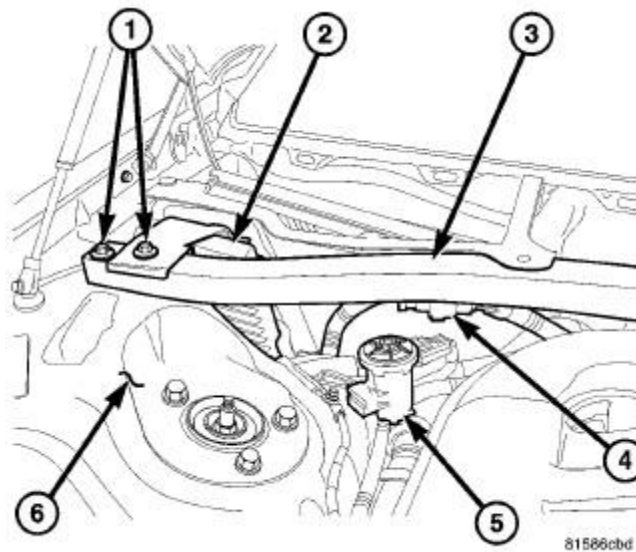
Bolts, PCM, Strut Support, Wire Harness, Purge Solenoid & Passenger Side Strut Tower
